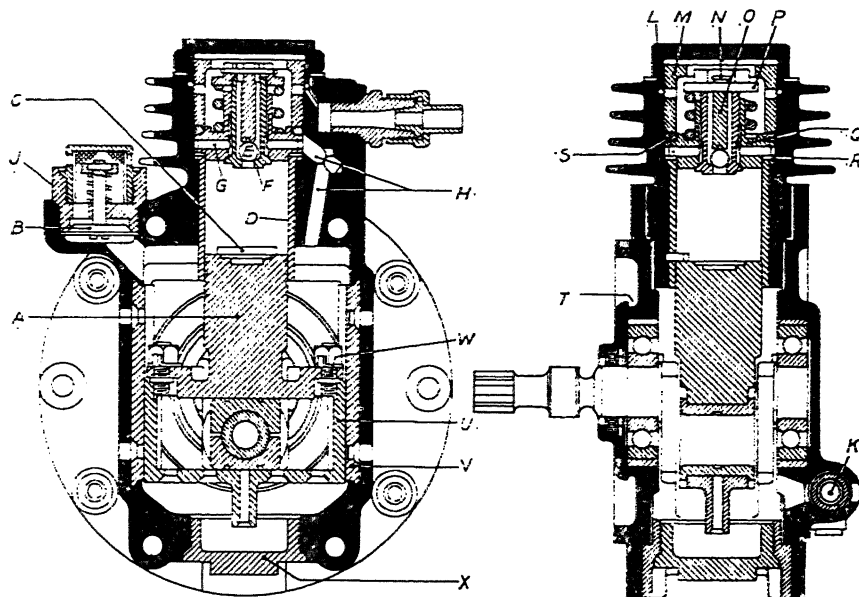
CROSS-SECTION THROUGH A TYPICAL AIR COMPRESSOR
